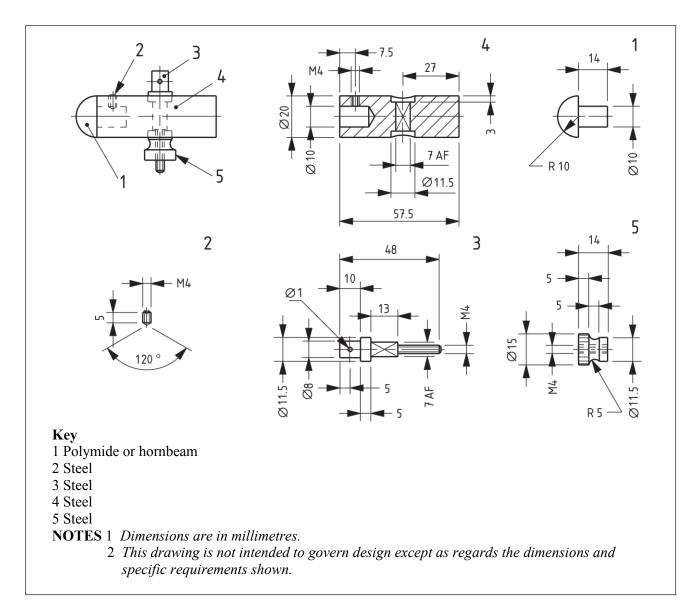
Pendulum impact test: Constructional details of striking elements (see 20)
